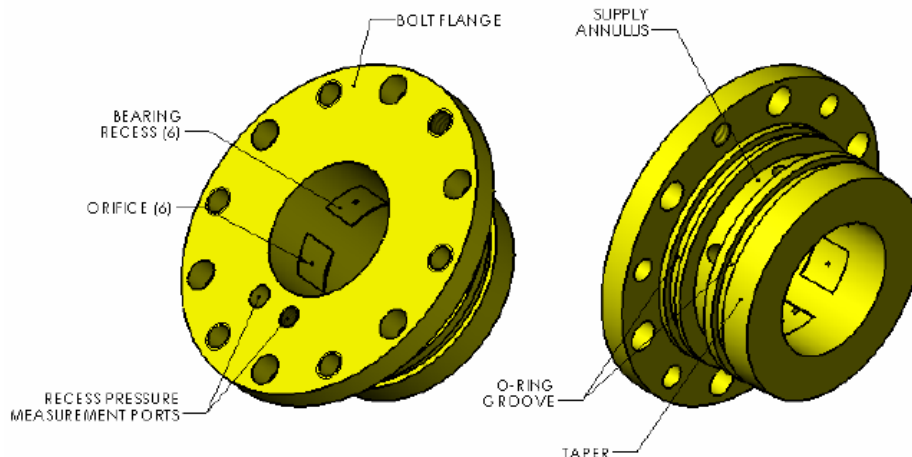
Hybrid bearing design from Solidworks by Pavelek [6].
